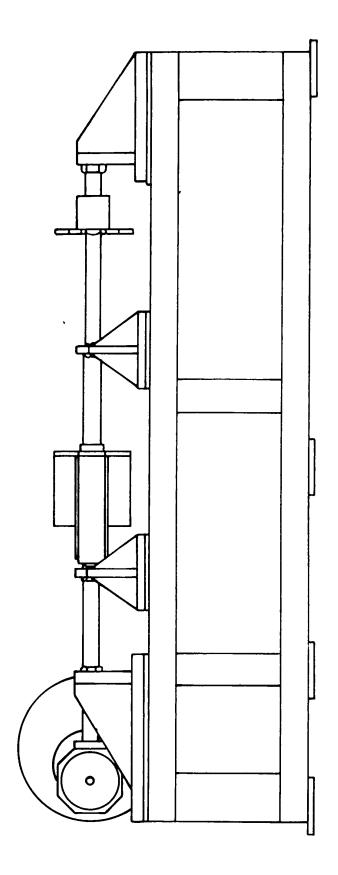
FIG. I. MACHINE LAYOUT - SIDE VIEW.
